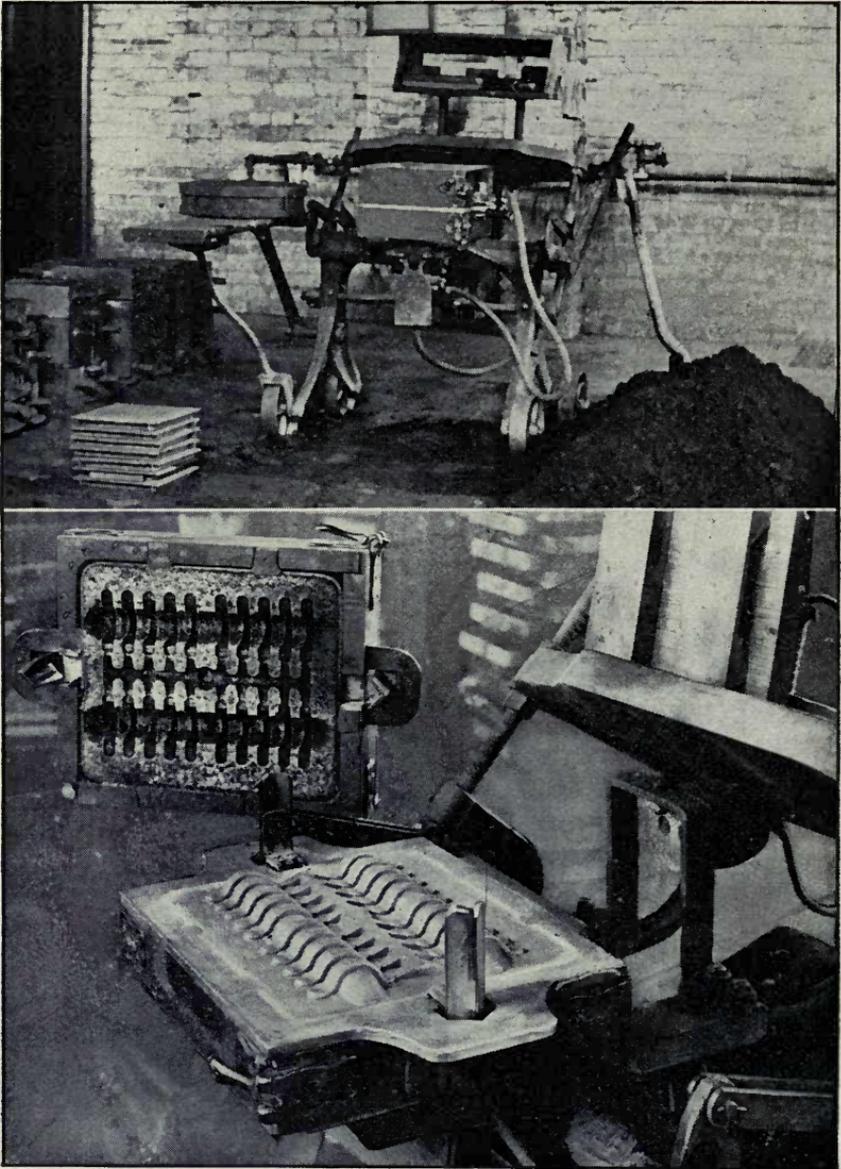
Hand operated squeezer-type molding machine and (below) mold and pattern equipment in position on machine. Heavier machines operated by air also are used in the industry
